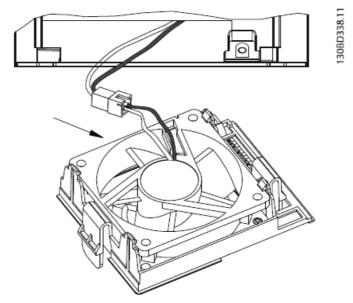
Fan Cable Plug. Plug Location Depends on Fan Type.
